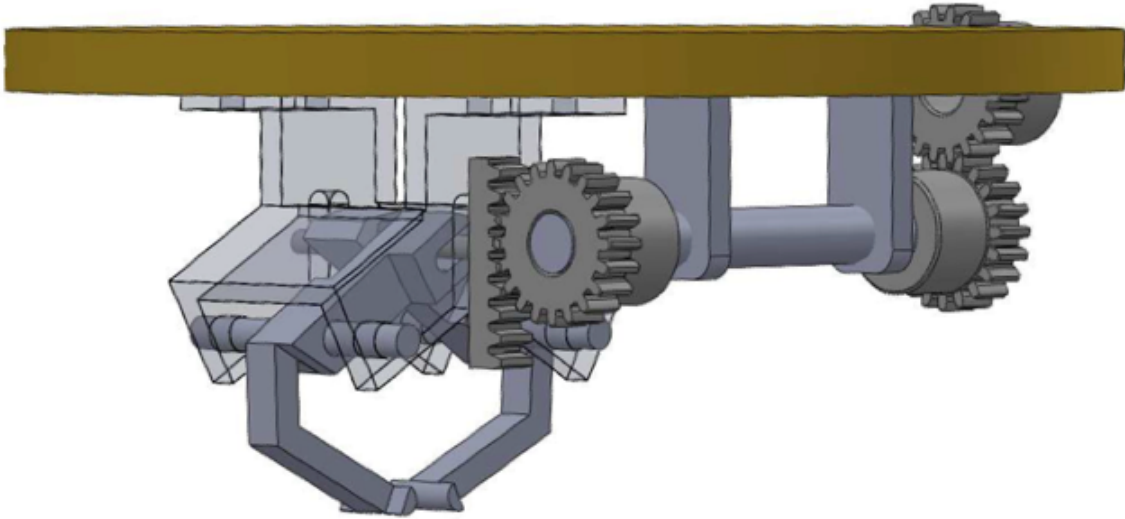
First prototype of a clamping mechanism that will attach onto the cold plate. Rotary feedthrough and silicon sample are not pictured.
